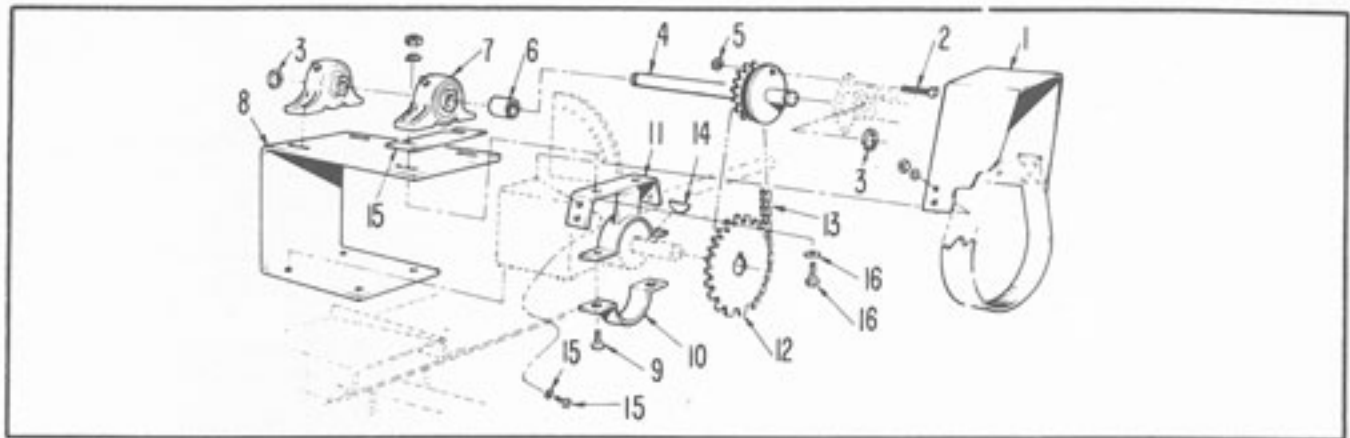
8086 - 2-SPEED ATTACHMENT KIT
